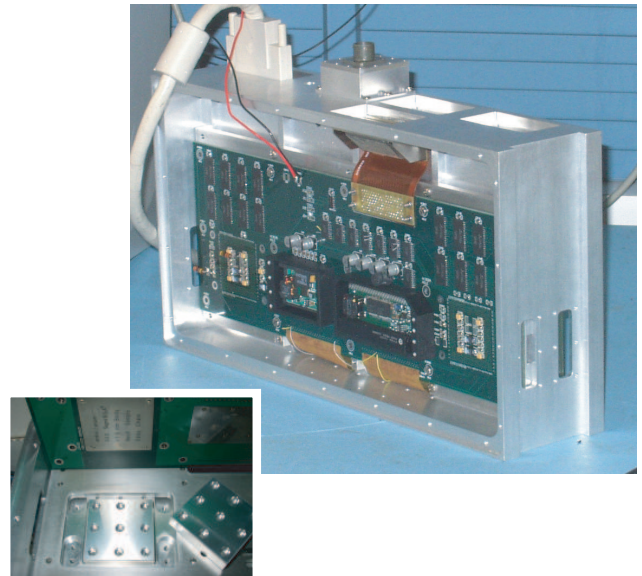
Space-grade chassis with assembled printed circuit boards for the PR-2 processor/controller. Machined heat sink blocks for conductive cooling of the FPGA ball-grid array packages [inset].
